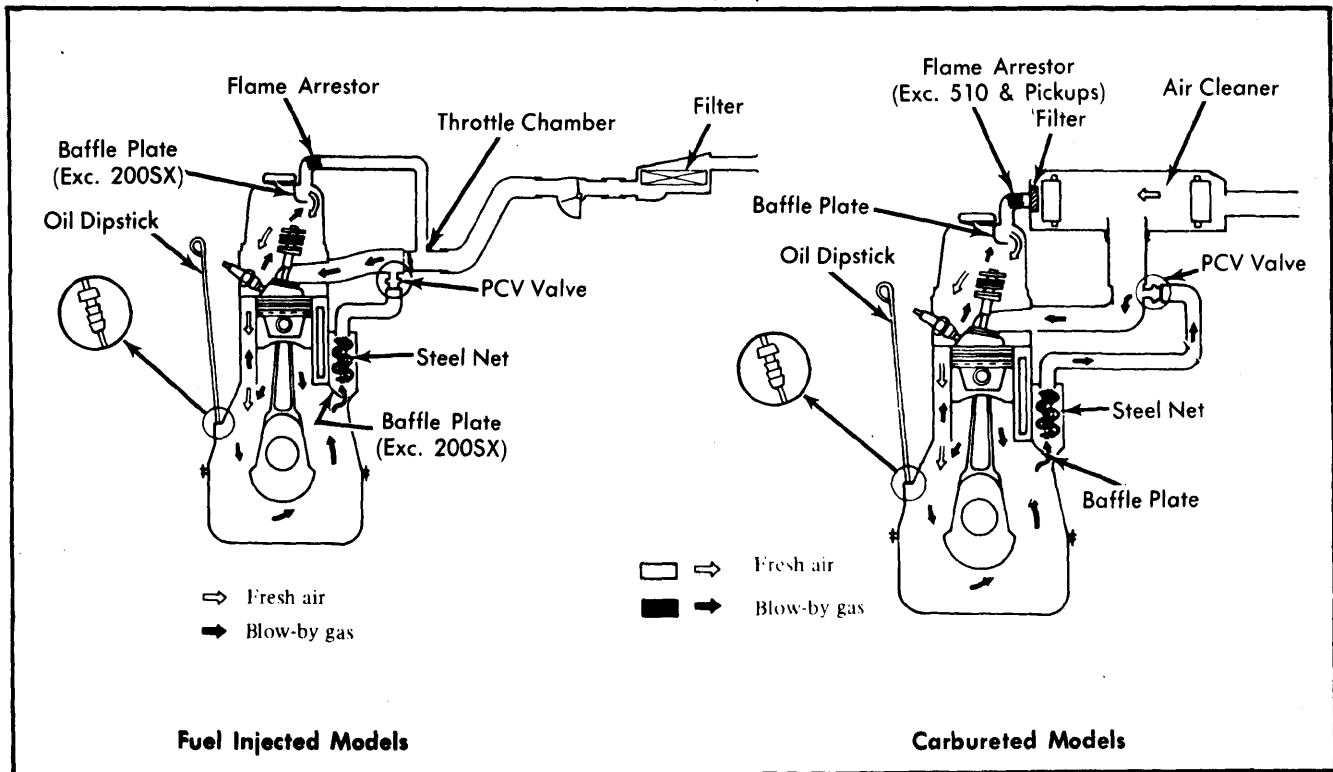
Datsun Crankcase Ventilation System Illustrated (Differences Between Fuel Injection & Carburetor Models Shown)
